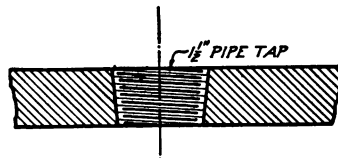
Conventional Drawing of Thread in a Pipe Fitting
